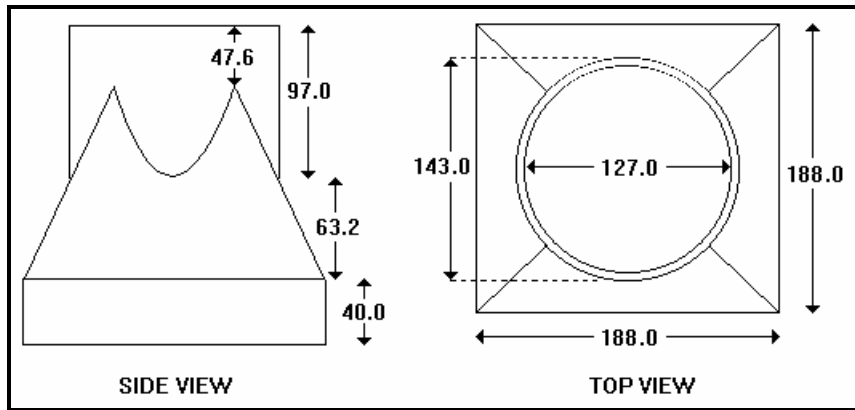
Side and top view of the shape with dimensions in millimetres
